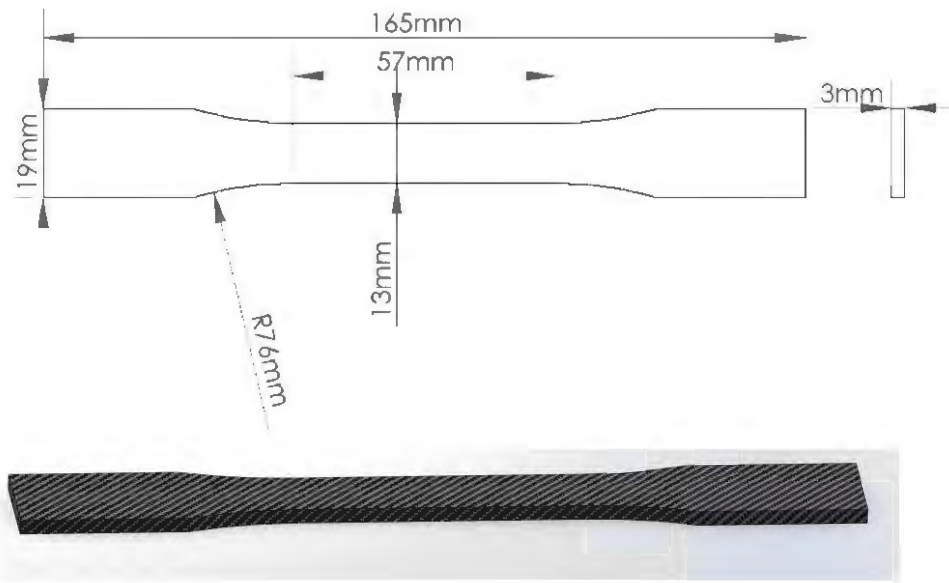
Specimen dimensions and 3D CAD Model used for tensile testing.
